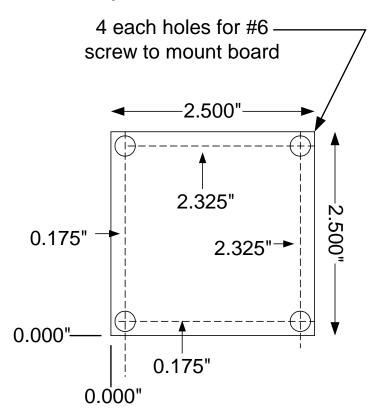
PMDX-105 Quad Isolator Board Dimensions
